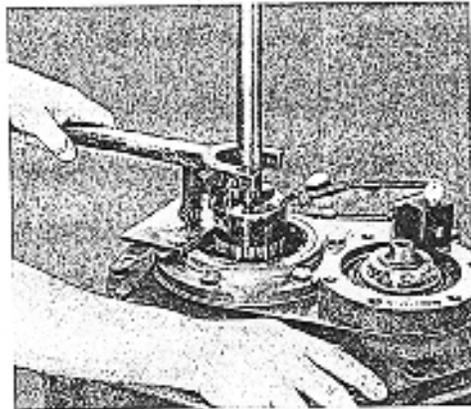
Checking End Play with Special Tool no. 1-90017 and 1-90026. Note: A small steel plate should be located over oil seal to protect it from damage by tool.
